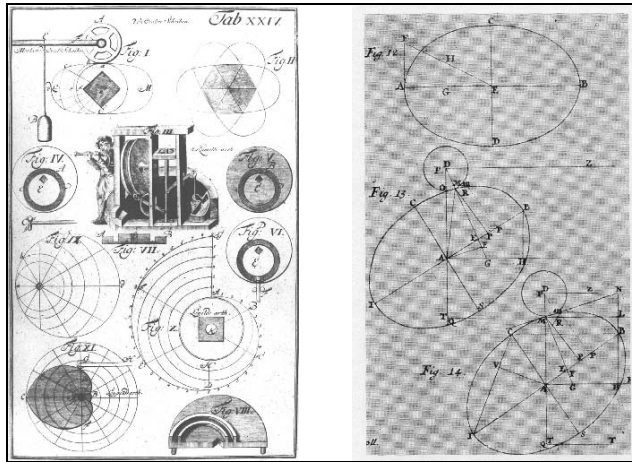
Two examples of cam mechanisms in machines taken from different machine books
